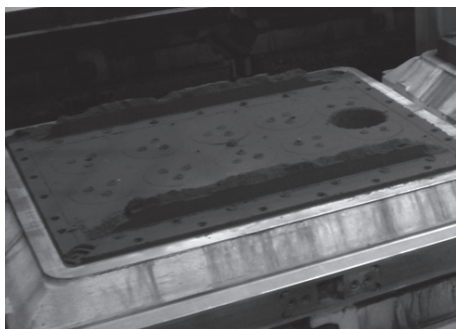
Shape of the nozzle part at the back side of ACE mold.
